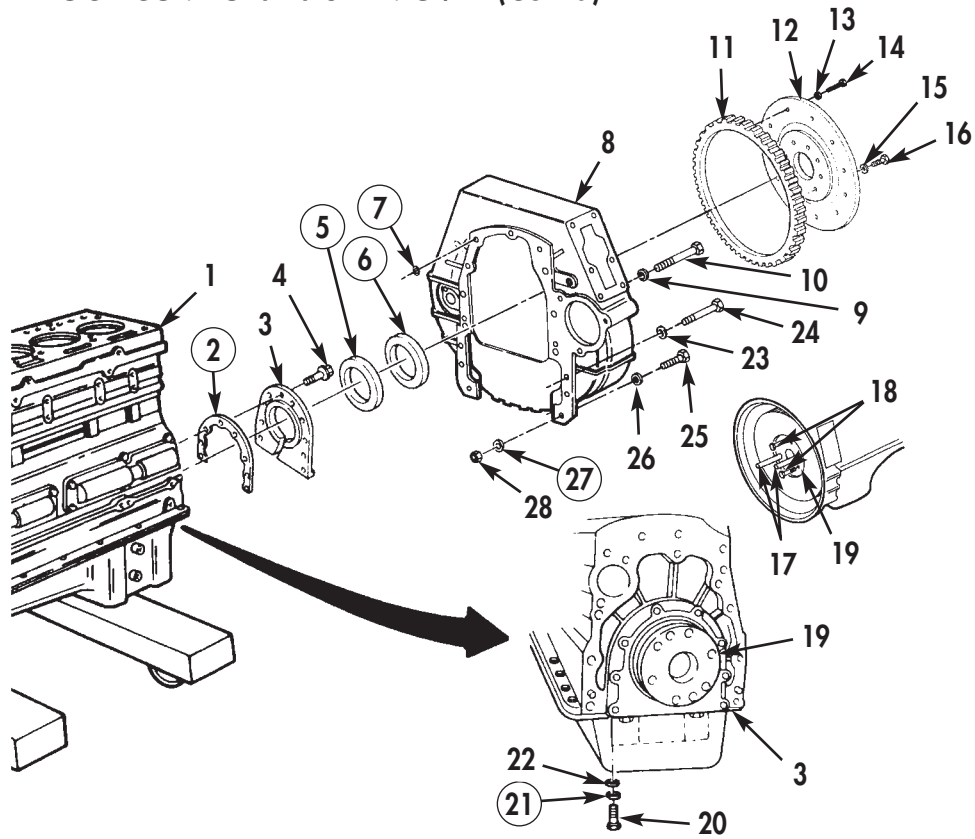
Flexplate and Flywheel Removal (Big Cam I).
